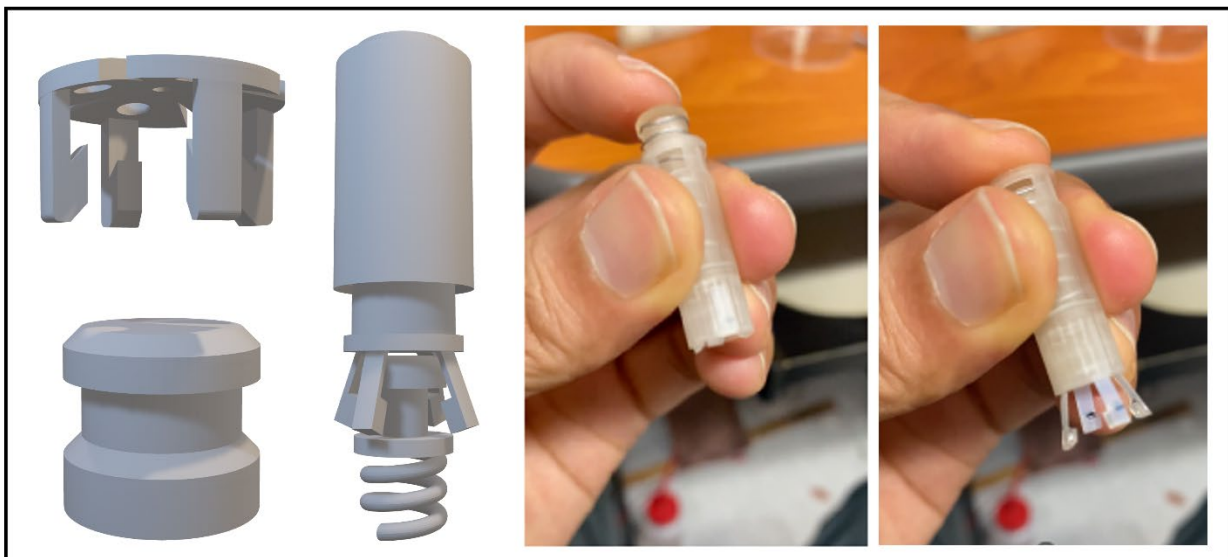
Design of the pacemaker together with picture of 3D printed prototype.
